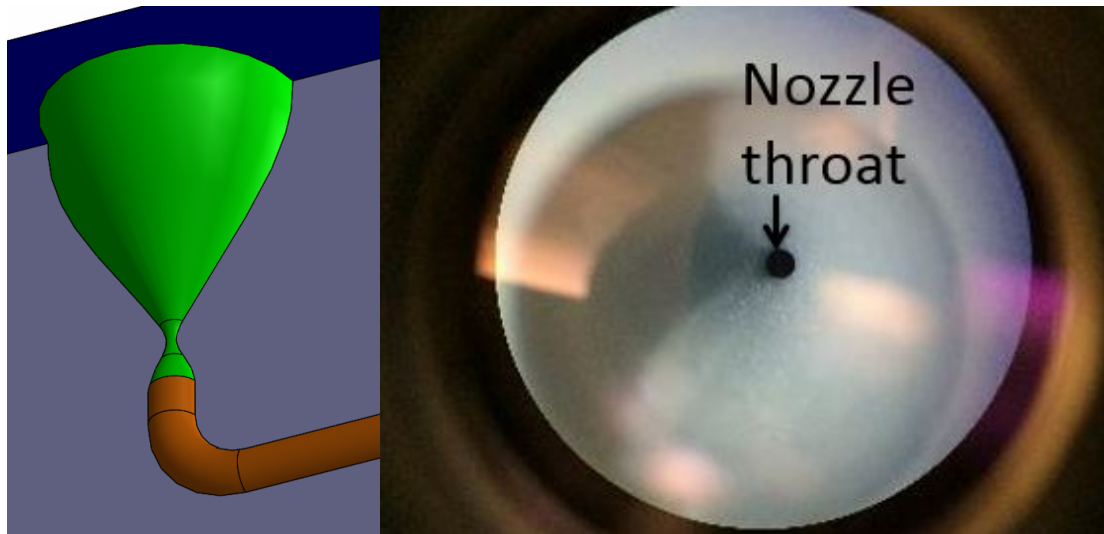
Left: nozzle cutaway, showing converging-diverging section (green) and feed pipe (orange). Right: magnified image of an as-printed nozzle.
